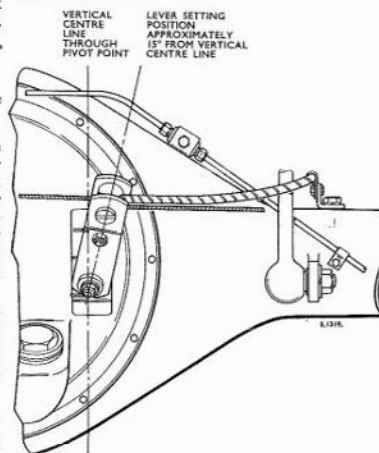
Setting position for the handbrake compensator lever when adjusting the handbrake secondary cable
